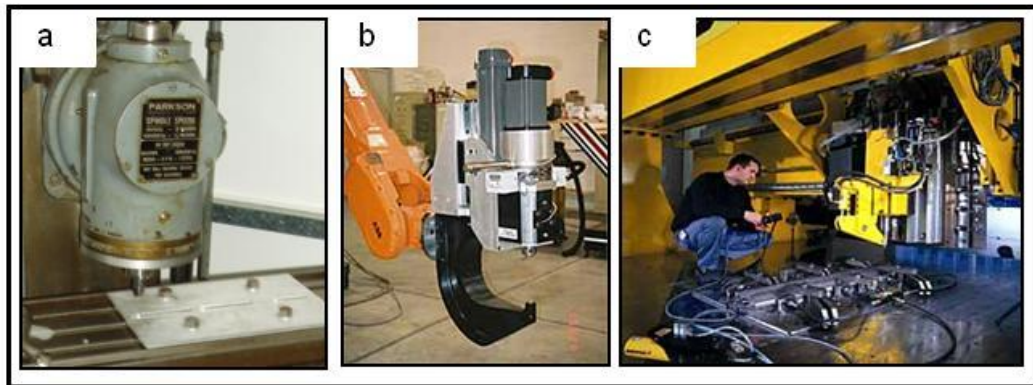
, FSW Machines: a) Milling Machine Spindle, b) Robotic Arm Mounted Spindle [11], c) Gantry Mounted Spindle [9].
